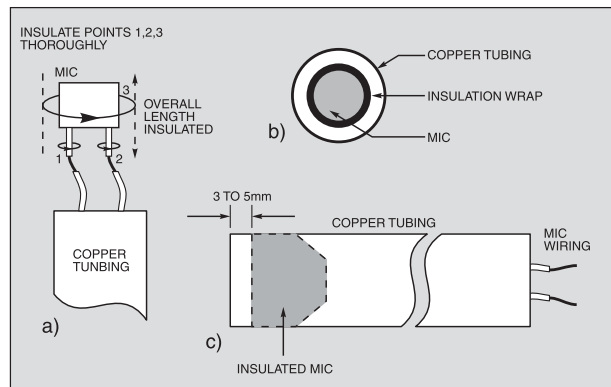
Insulating and wiring the microphone insert (a), end view showing insert "plugged" into the copper pipe (b) and the Mic. insert recessed in the copper tubing (c)
